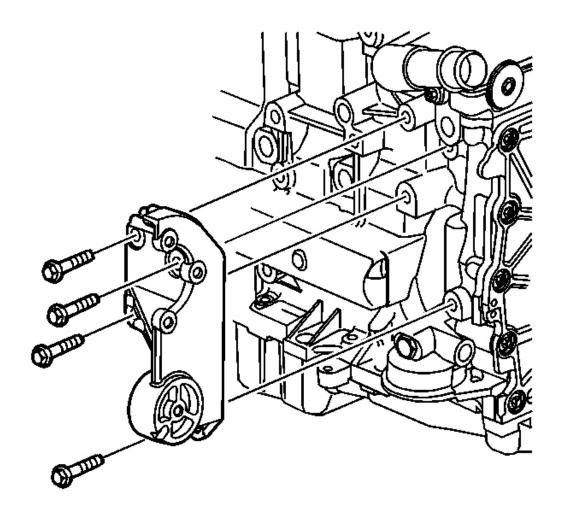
View Of Power Steering Pump Bracket Courtesy of GENERAL MOTORS CORP.
